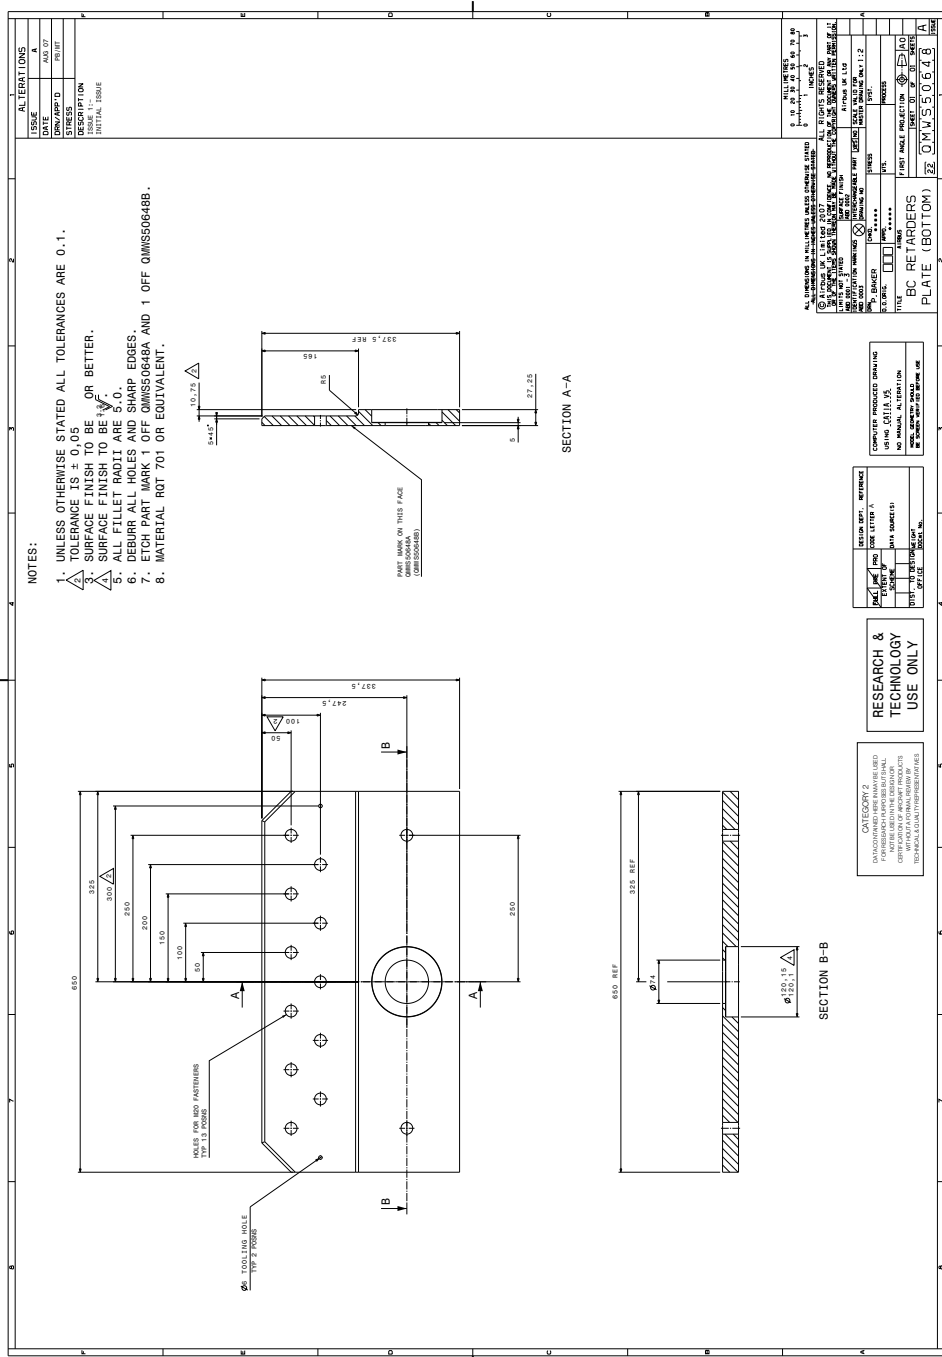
Technical drawing of the bottom plate of the end fitting. The drawing was provided courtesy by Airbus.
